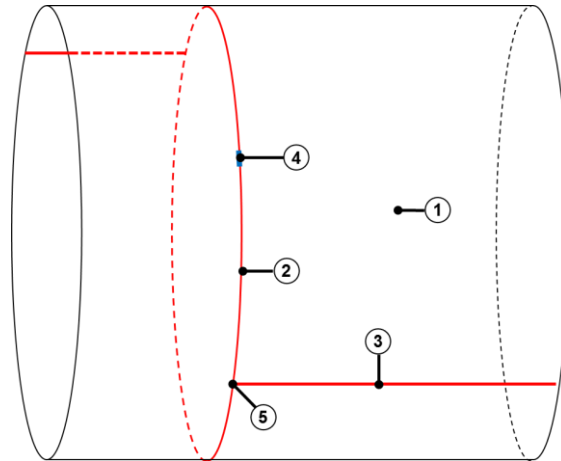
Regions for residual stress measurements. (1) Base metal, (2) Circumferential weld, (3) Longitudinal weld, (4) Weld repair region, and (5) Weld intersection.
